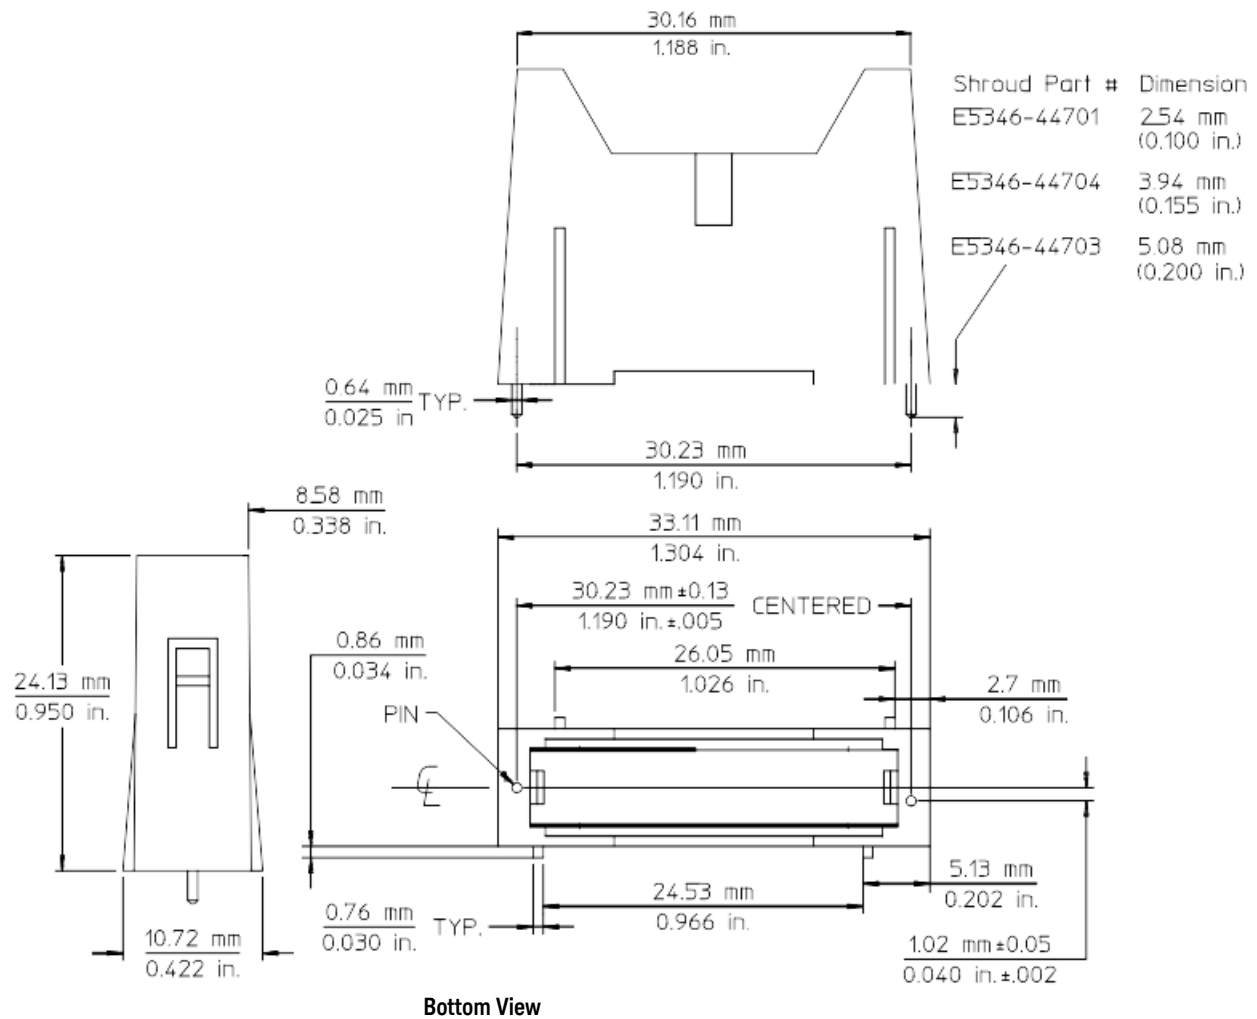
Support shroud dimensions for the U4205A's MICTOR 38-pin connector
